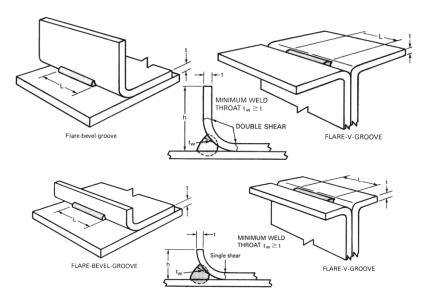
B - Single Shear in Flare-Groove Welds (See 2.2.5(2))
